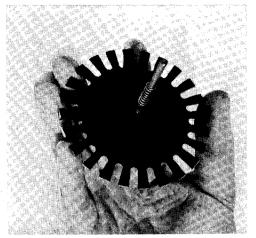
The rotor on the shaft, with the spiral wire "worm" described.
